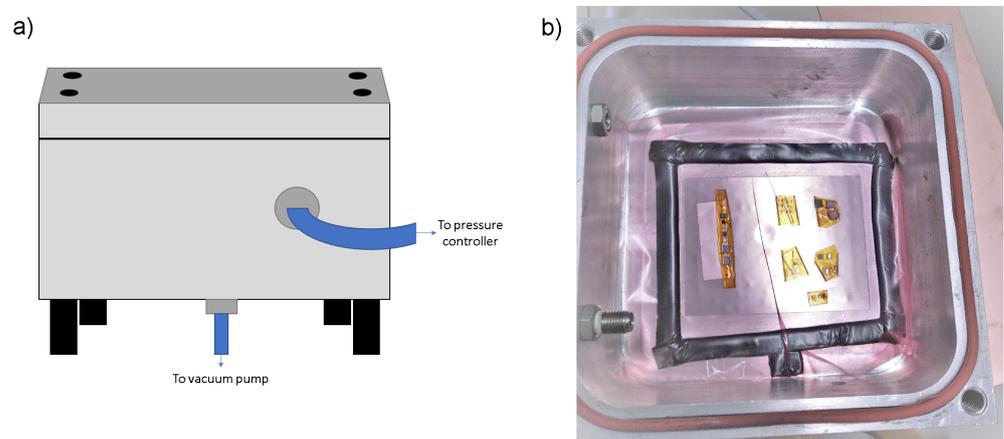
Steel box with gasket, inserted component test-plate and applied vacuum bagging film before insertion into the oven. (a) Schematic view of the pressure chamber. (b) Photography of the prepared chamber.
